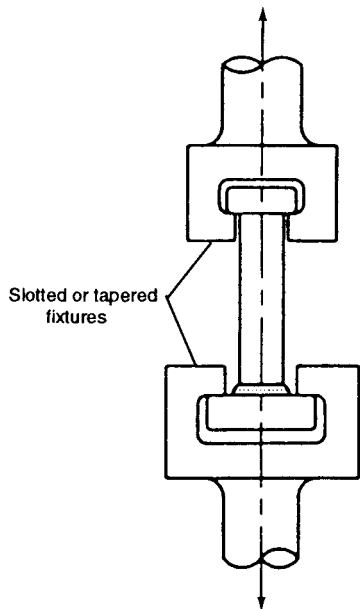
Typical tension test fixture. For qualification of application or preproduction testing, either bend or torque testing can be substituted for tension testing.
